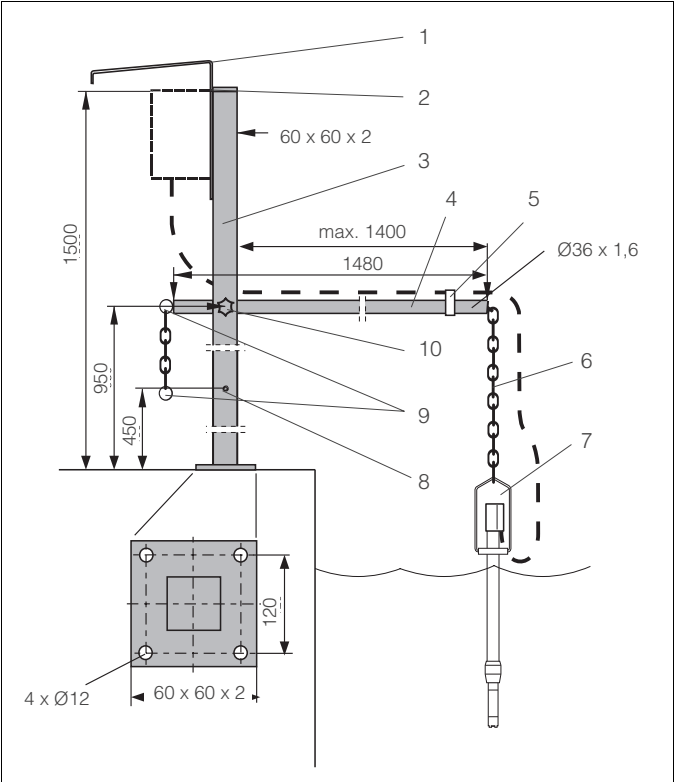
Universal assembly support OYH 101-A with immersible pendulum assembly OYA 611
